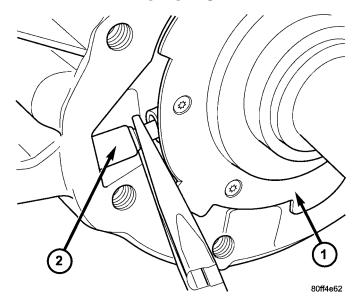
Disengage The Oil Pick-up From Oil Pump 1 - OIL PUMP
